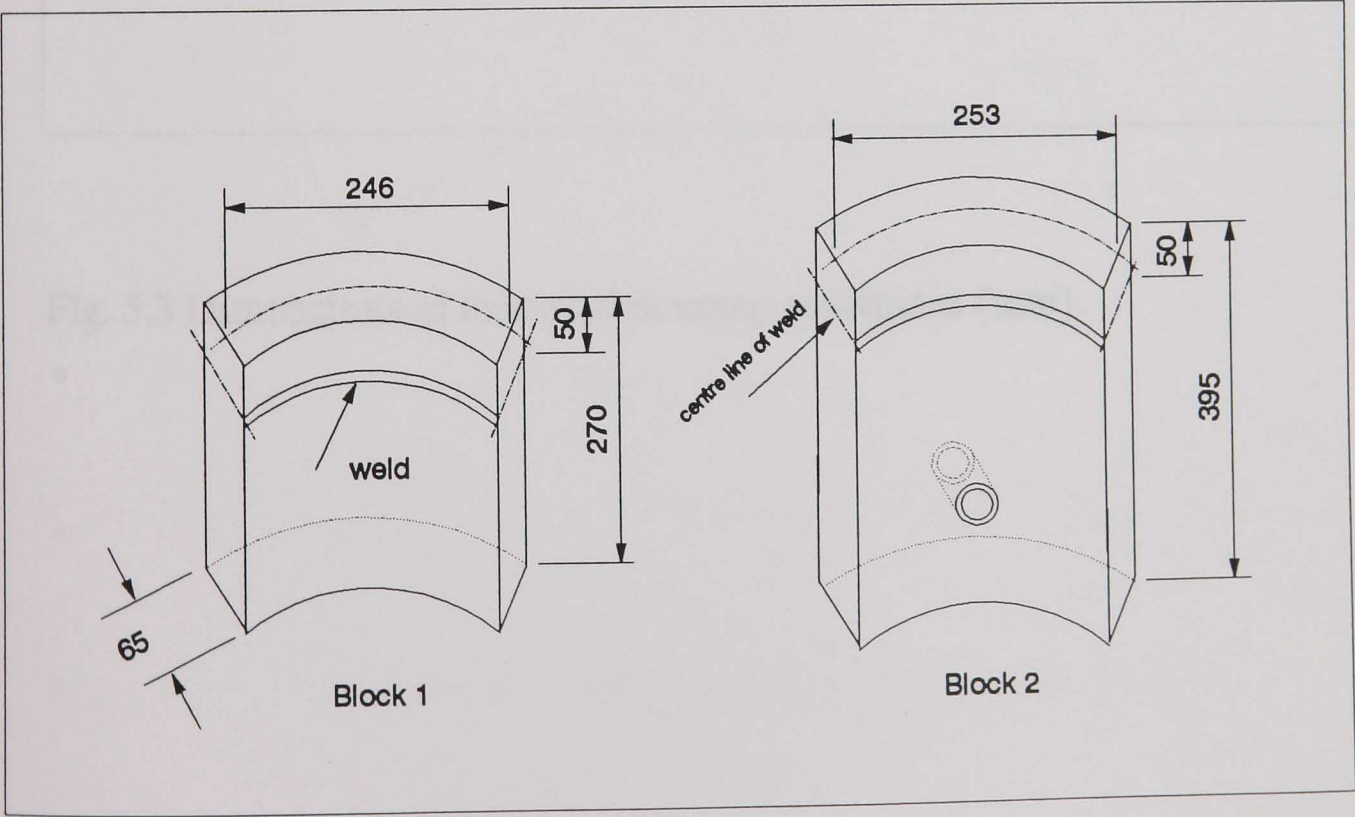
Sections of exposed pipe with weld from which test specimens were machined (dimensions in mm).
